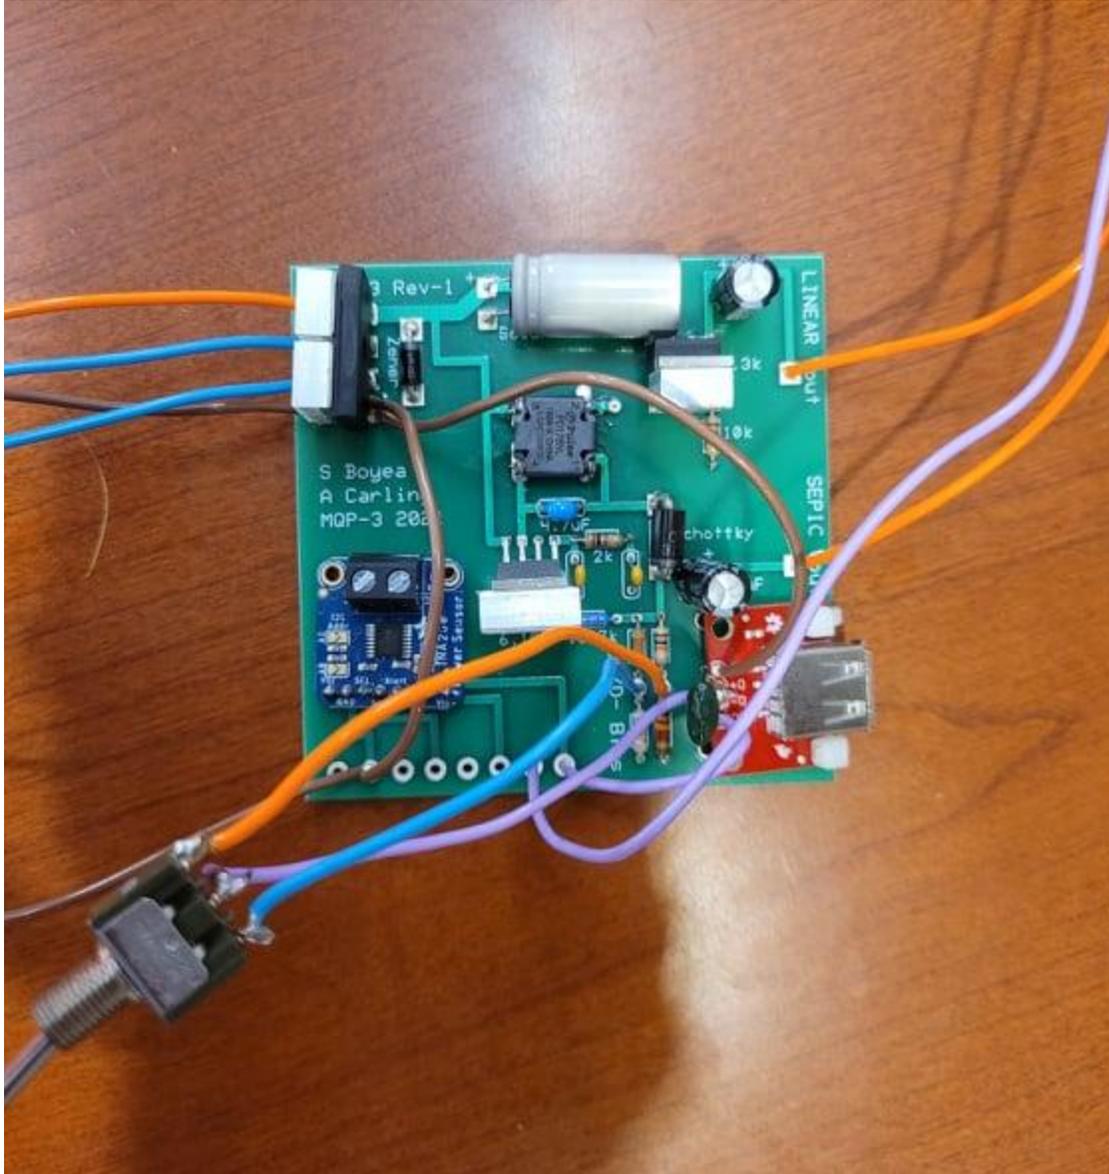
PCB Assembled, Missing Raspberry Pi Connections
